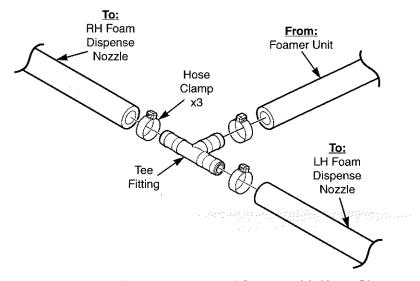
Assemble Supply Hoses and Secure with Hose Clamps
